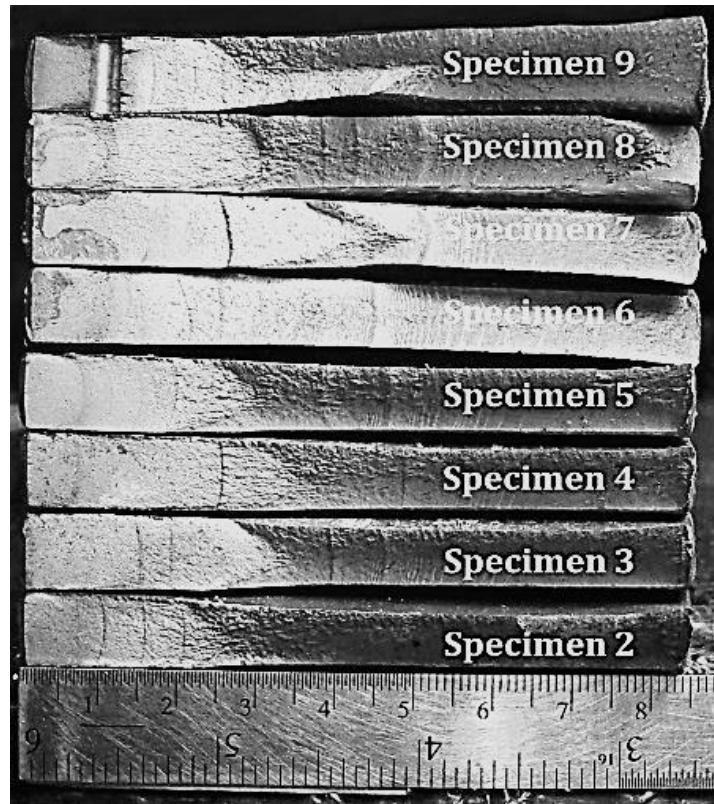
Fracture surfaces of Specimens 2 through 9
